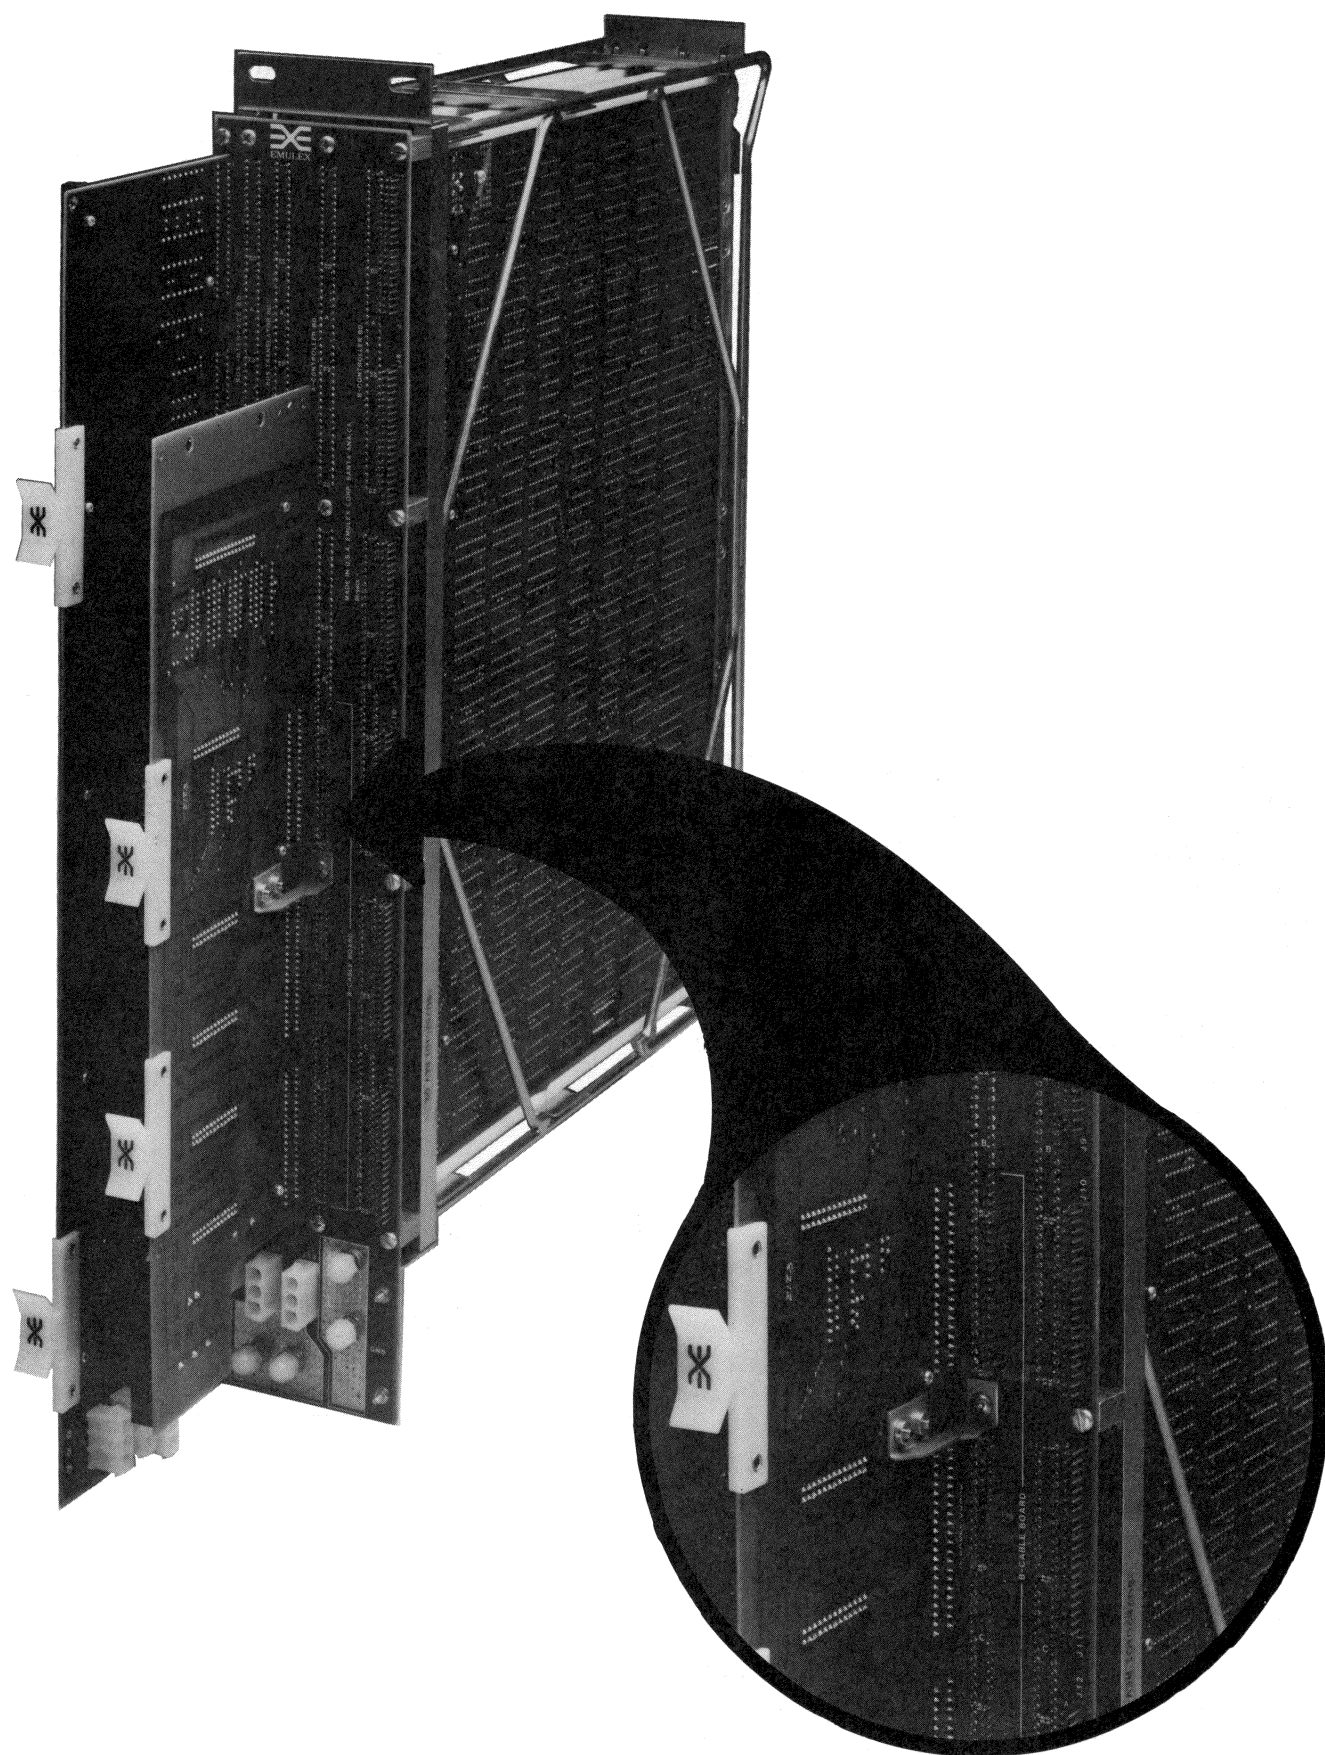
Cable Paddleboard PCBA Installation Detail
